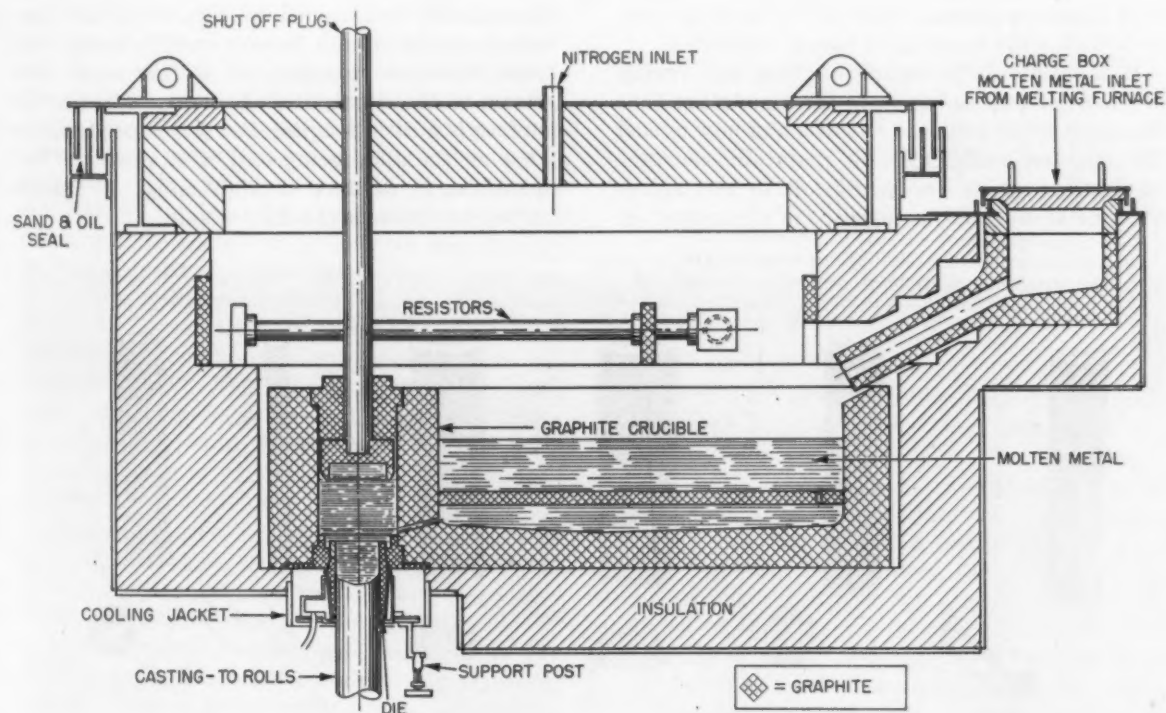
Cross-section of casting furnace showing path of liquid metal from the main chamber into the die. The cooling jacket is held in position by three spring mounted support posts, one of which is shown.
